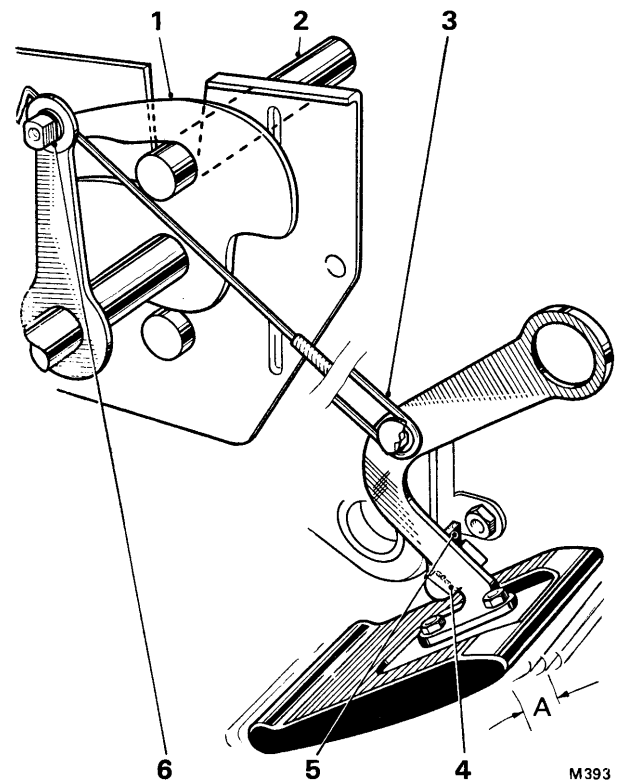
SETTING THE BONNET CATCH OPERATING MECHANISM
